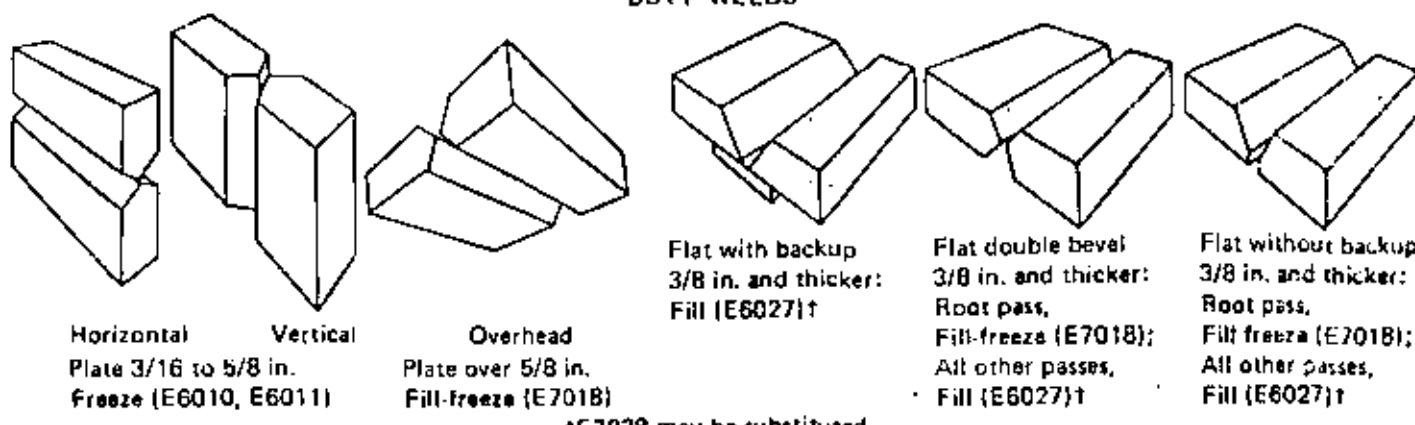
Guide to selection of electrodes for butt welds.
